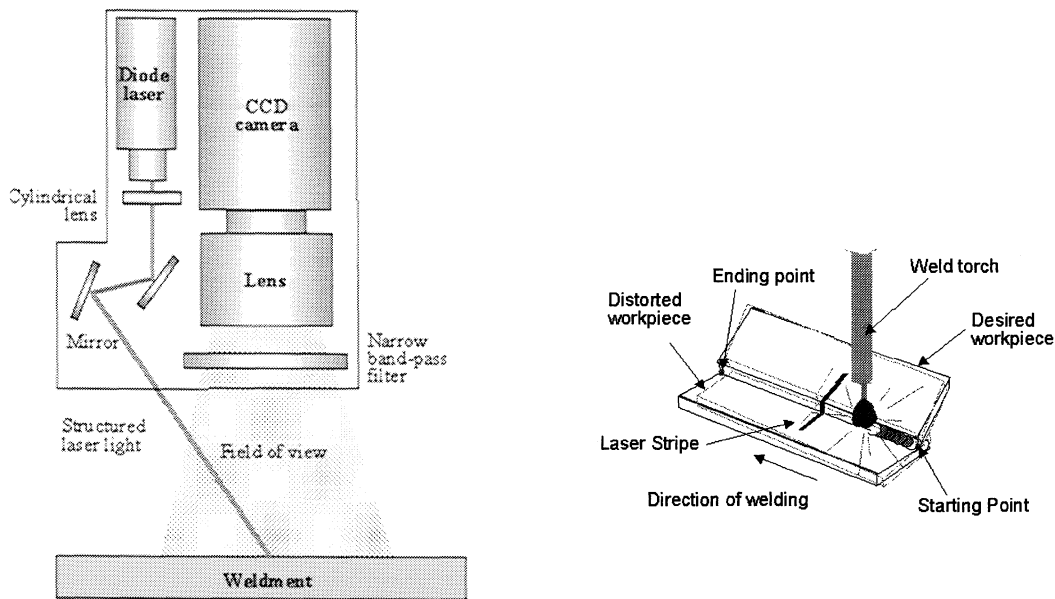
Configuration of the vision sensor. Fig. 2. Arc welding system with vision-guided path correction.
